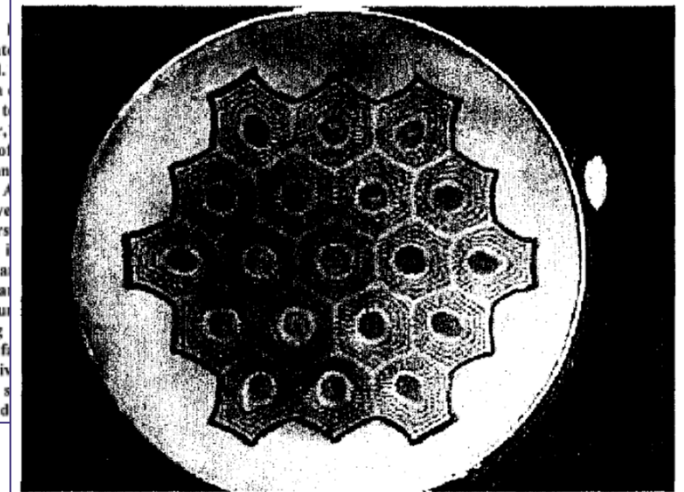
Hot Extruded Rod Billet with salt packed into the hex-rod centers.
